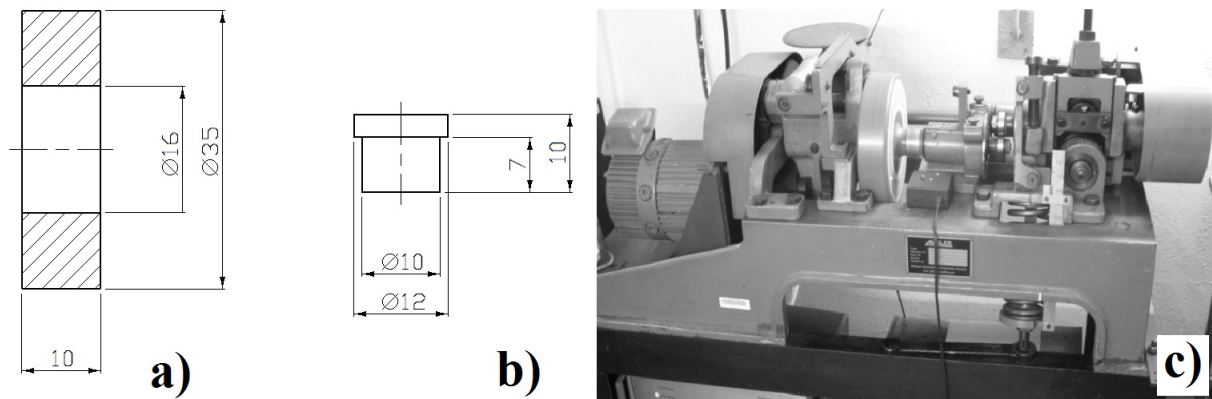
Counterspecimen (a) and specimen (b) for Amsler type A-135 slip-rolling machine investigation (c)
